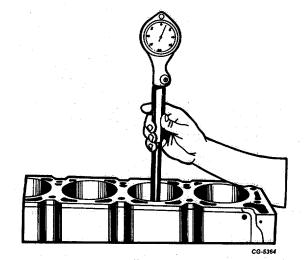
Checking Cylinder Bore Using Dial Bore Gauge SE-2331
